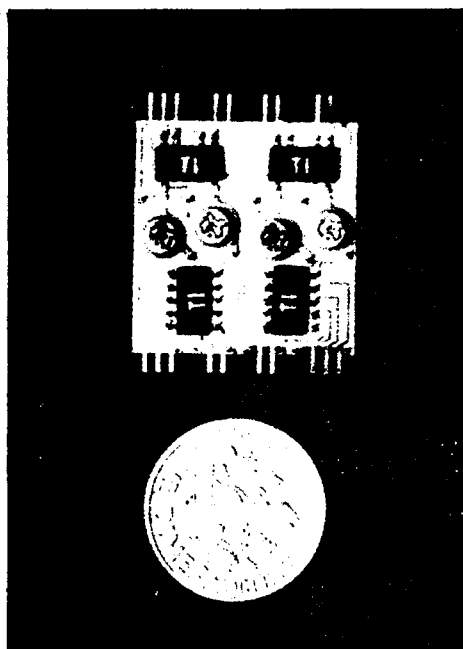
Here is a completed assembly of boards similar to the one in the previous picture.
